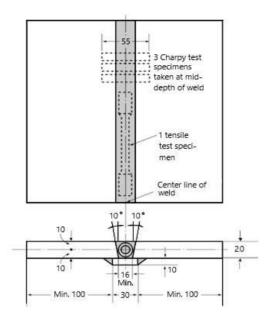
Deposited Metal Test Assembly for Electrode for Manual Arc Welding (unit : mm)
